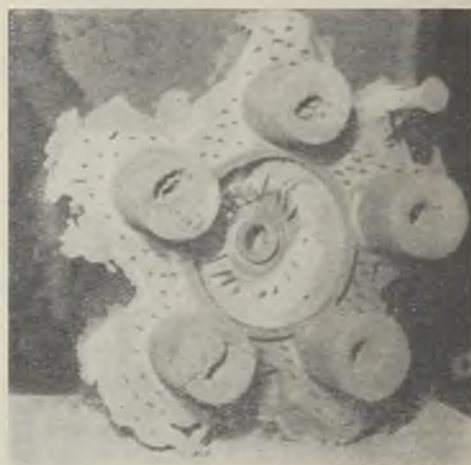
TYPICAL STEEL CASTING SHOWING SYSTEM OF RISERS.
